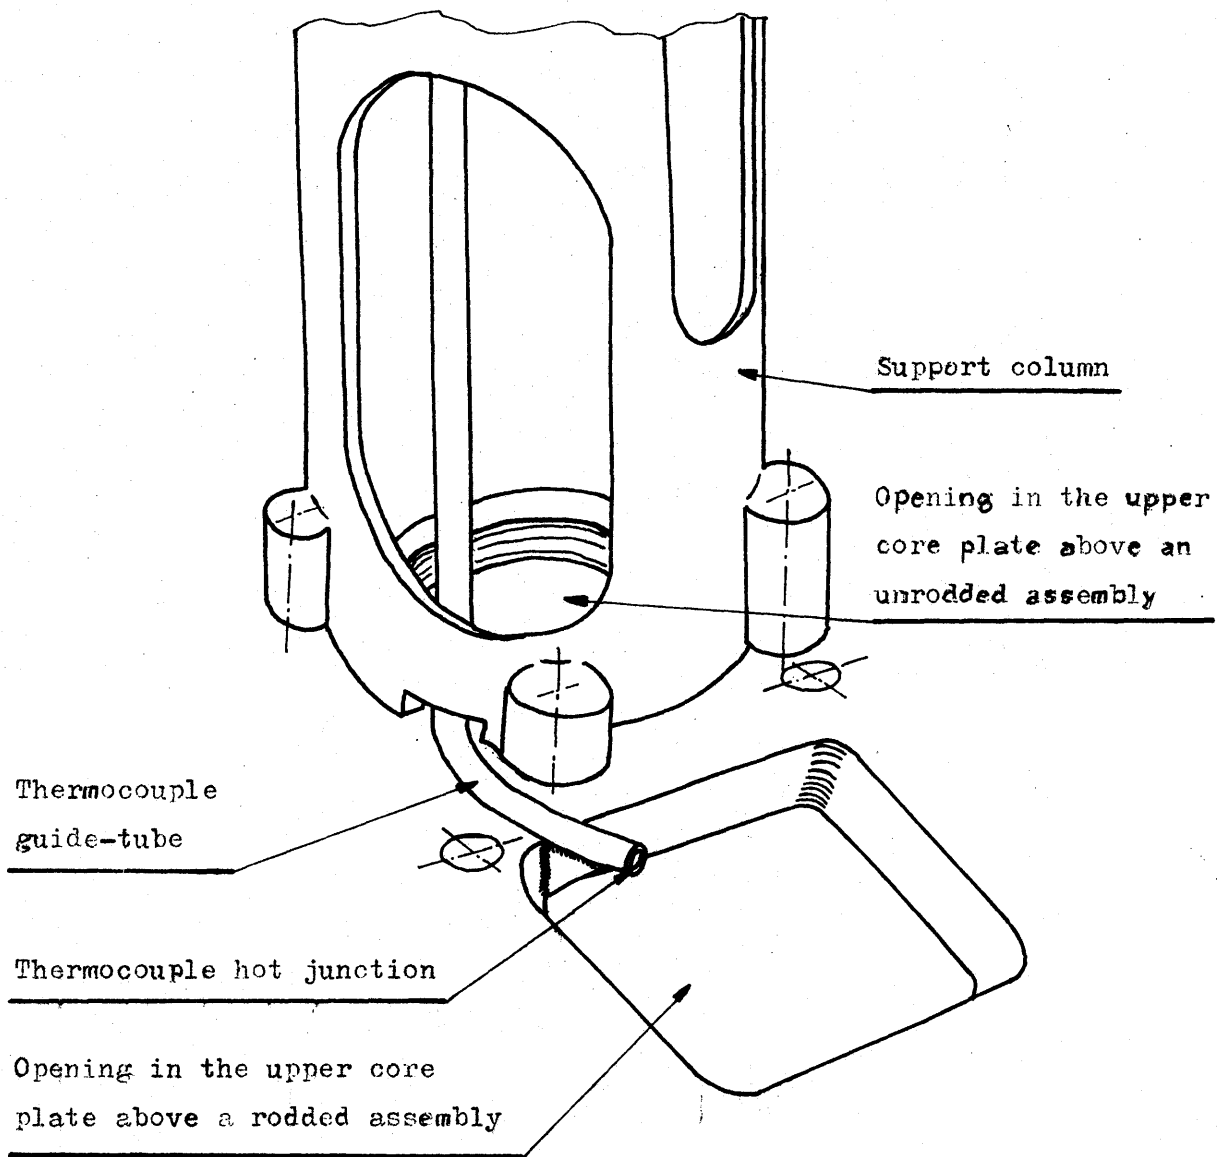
a Arrangement of the assembly exit thermocouple on the upper core plate. (From Ref. 5)
